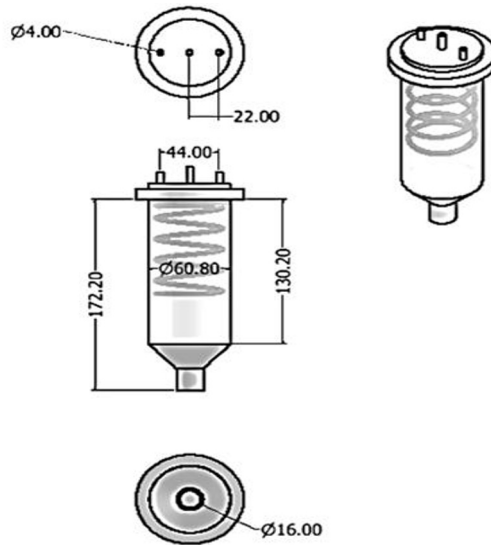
Drawing Geometry Metal Cyclonic Combustor.
